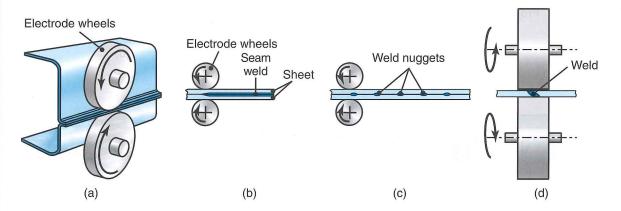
(a) Seam-welding process in which rotating rolls act as electrodes; (b) overlapping spots in a seam weld; (c) roll spot welds; and (d) mash seam welding.
